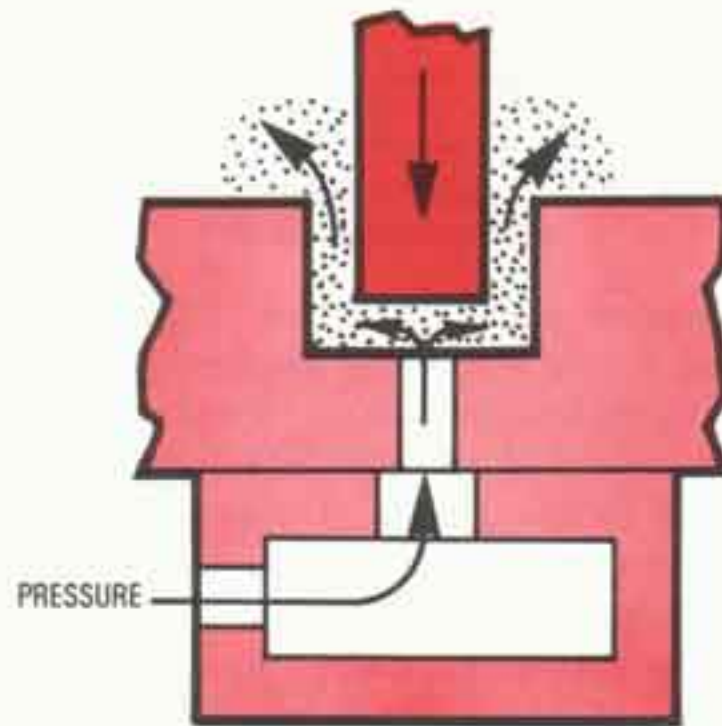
B Circulating dielectric fluid up through the workpiece
